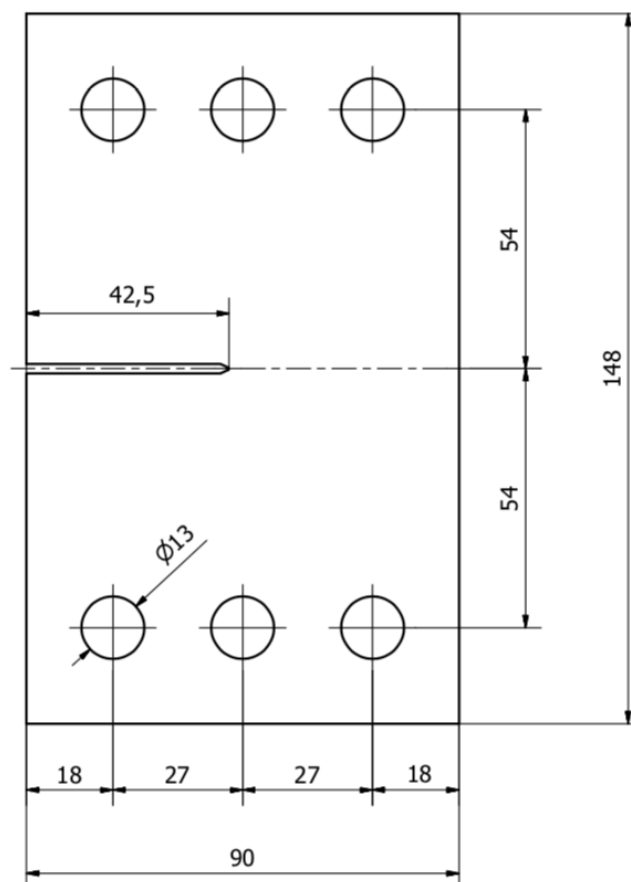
Dimensions of tested CTS specimen. Thickness: 4 mm.
